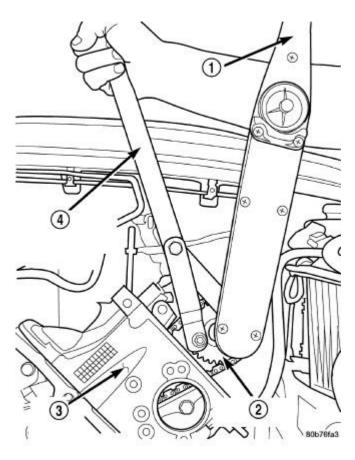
Camshaft Sprocket Courtesy of CHRYSLER LLC
